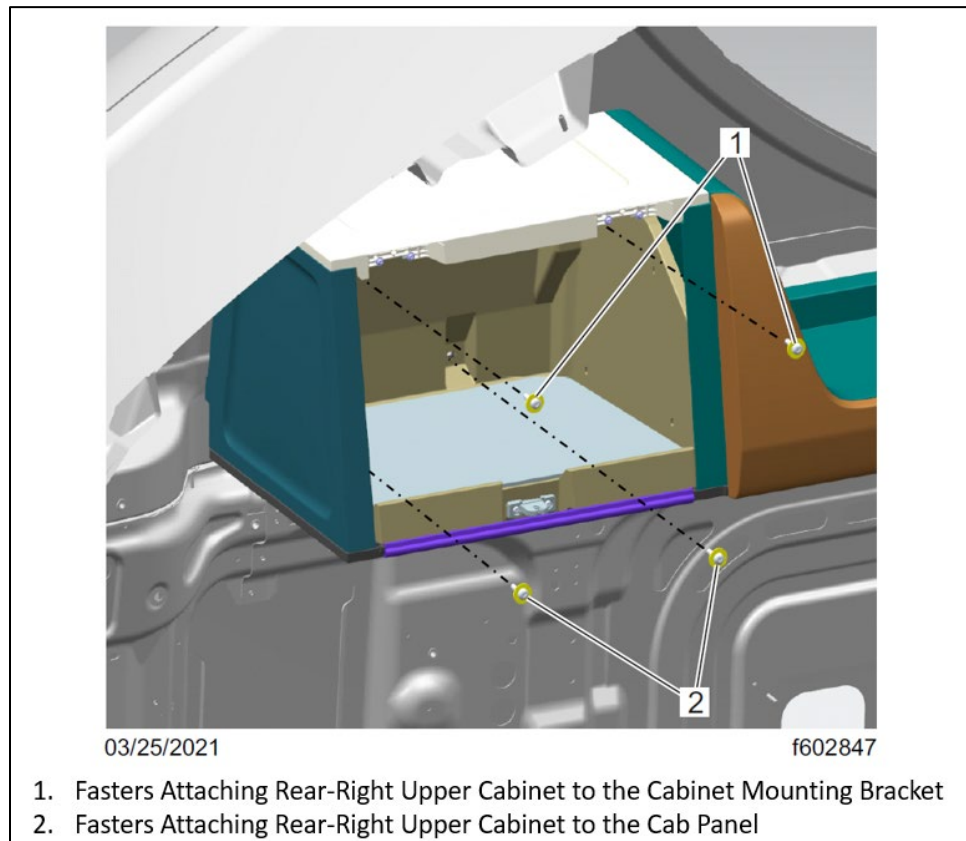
, Fasteners That Attach the Rear-Right Upper Cabinet to the Upper-Rear Shelf and Cab Panel
